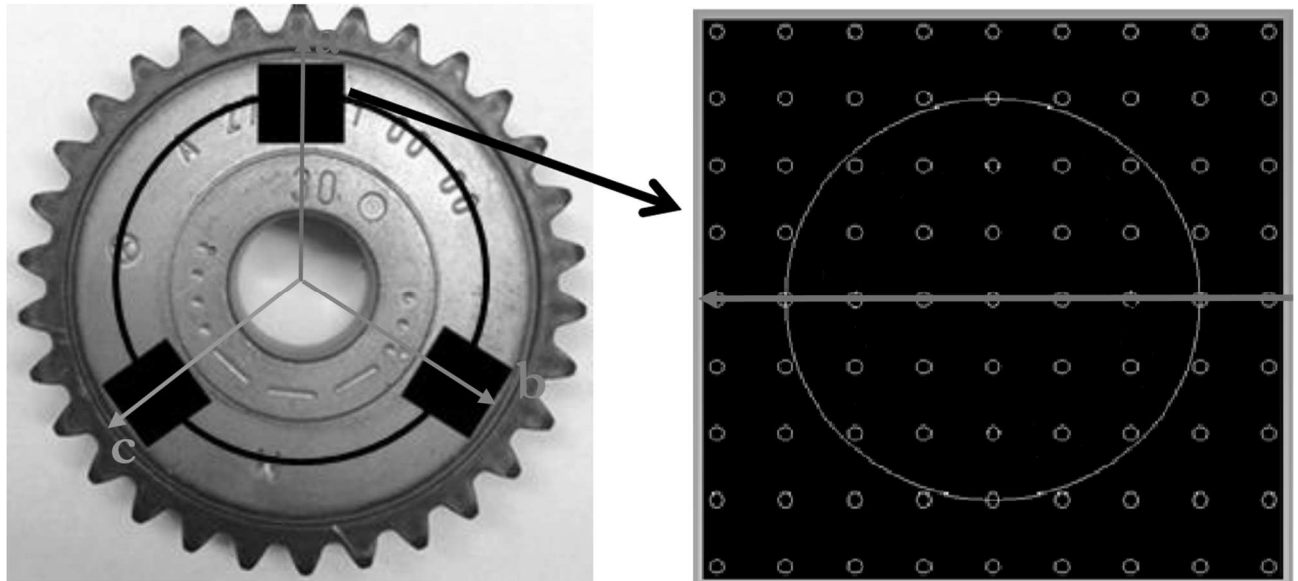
Scheme measurements on the area 8x8 with a circle, presenting drilled 6mm hole
